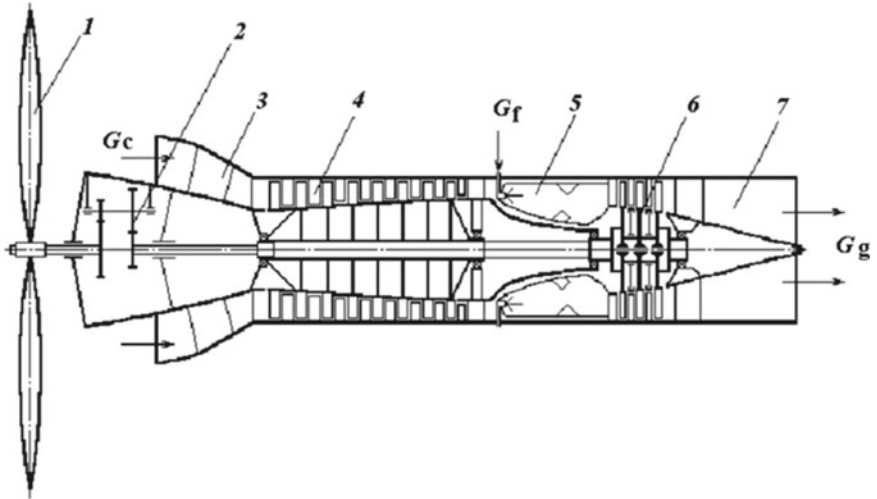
Diagram of the turboprop engine 1—propeller; 2—gearbox; 3—intake device; 4—compressor; 5—combustion chamber; 6—turbine; 7—exhaust channel (propelling nozzle)
